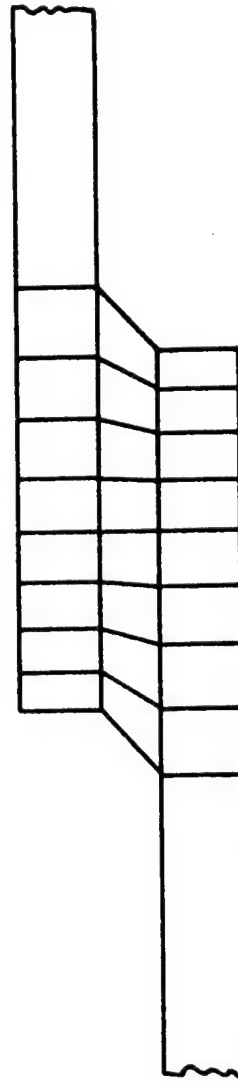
Typical Adhesive Bonded Lap-Type Joint
